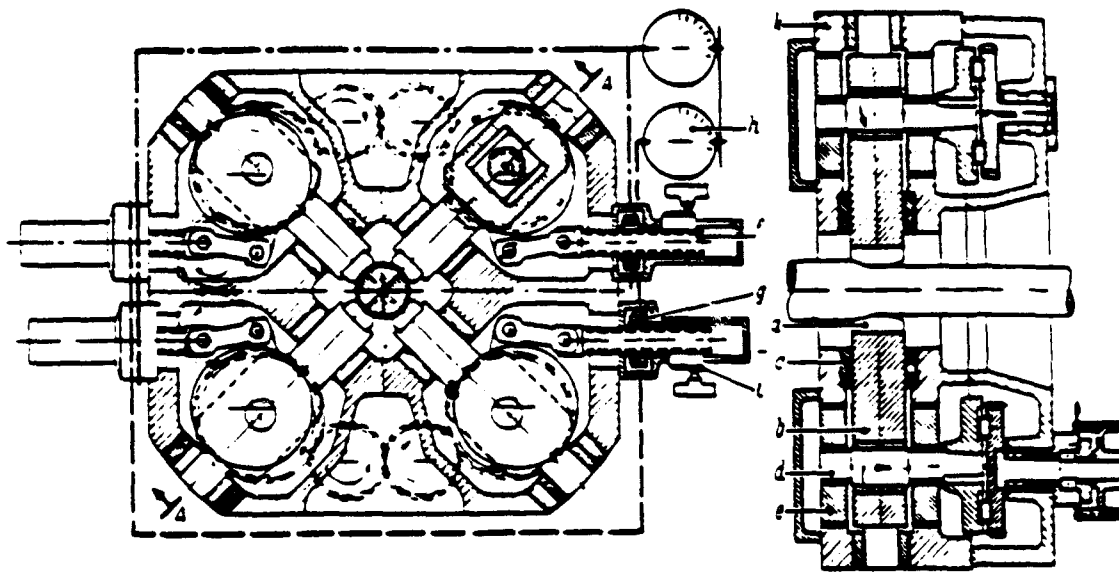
Cross-section of the GFM Radial Forging Machine (Ref. 6).
